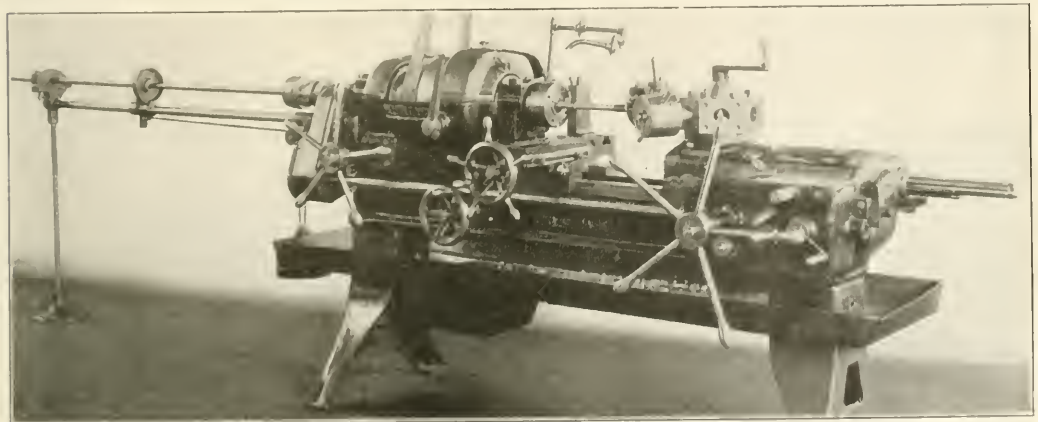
Lassiter-Milholland Model A Machine Equipped for Cutting Side Staybolts from Bar Stock
